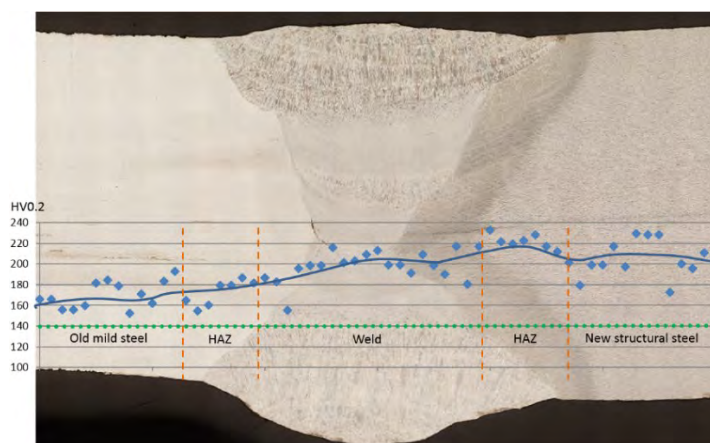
Hardness measurement at a microsection of an X-shaped butt weld
